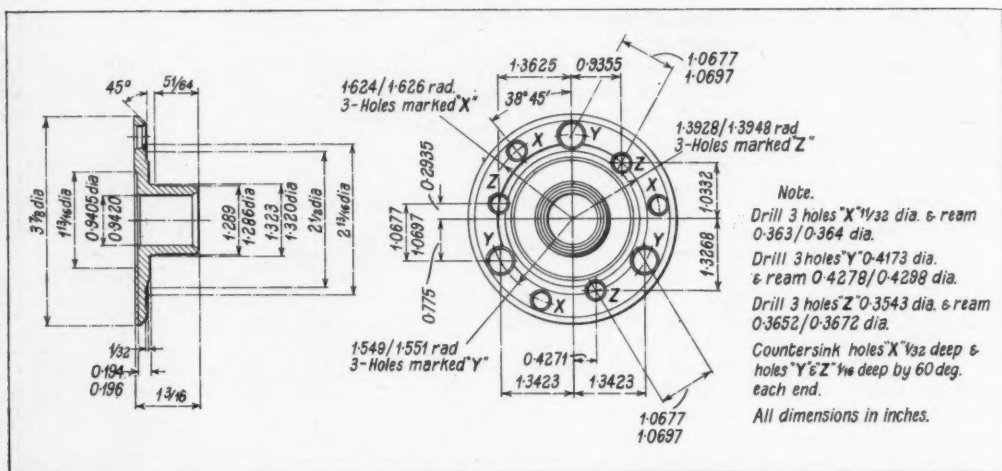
Views of the cover portion of the pinion carrier, prior to assembly. This component is machined from a malleable-iron casting on part of a line which is also employed for the production of similar parts for the larger, type 20 transmission
